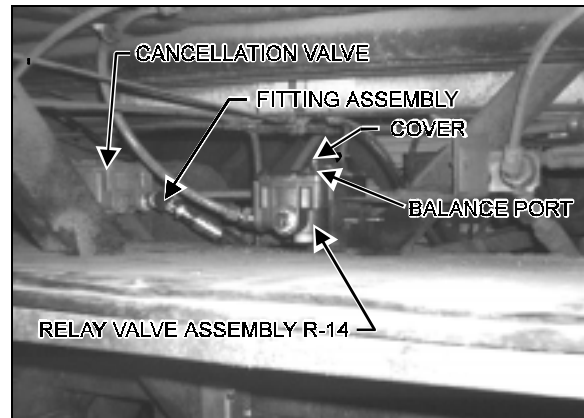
RELAY VALVE ASSEMBLY 12093
